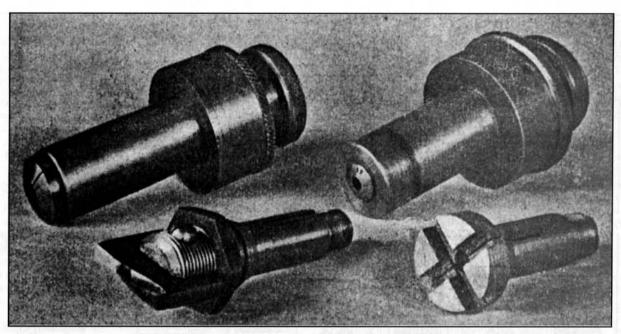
Adapters for Holding Round Tools or Works, and for Holding End Mills.
